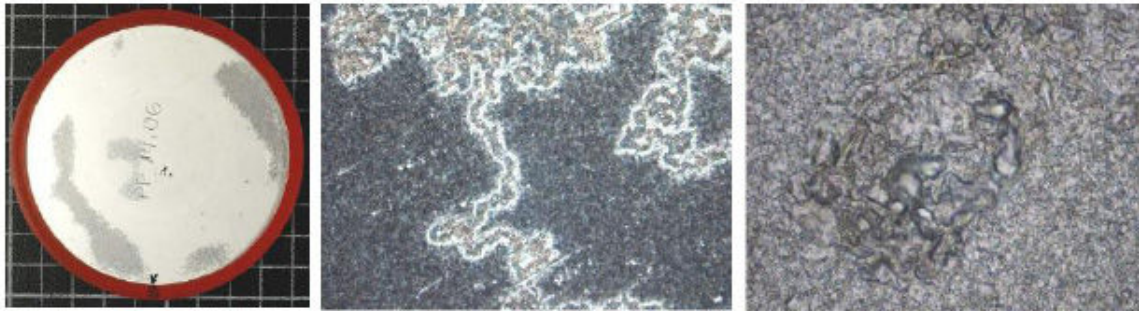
Anode side of wafer with partly melted aluminium contact layer. Middle picture is enlarged 45x, right picture 440x
